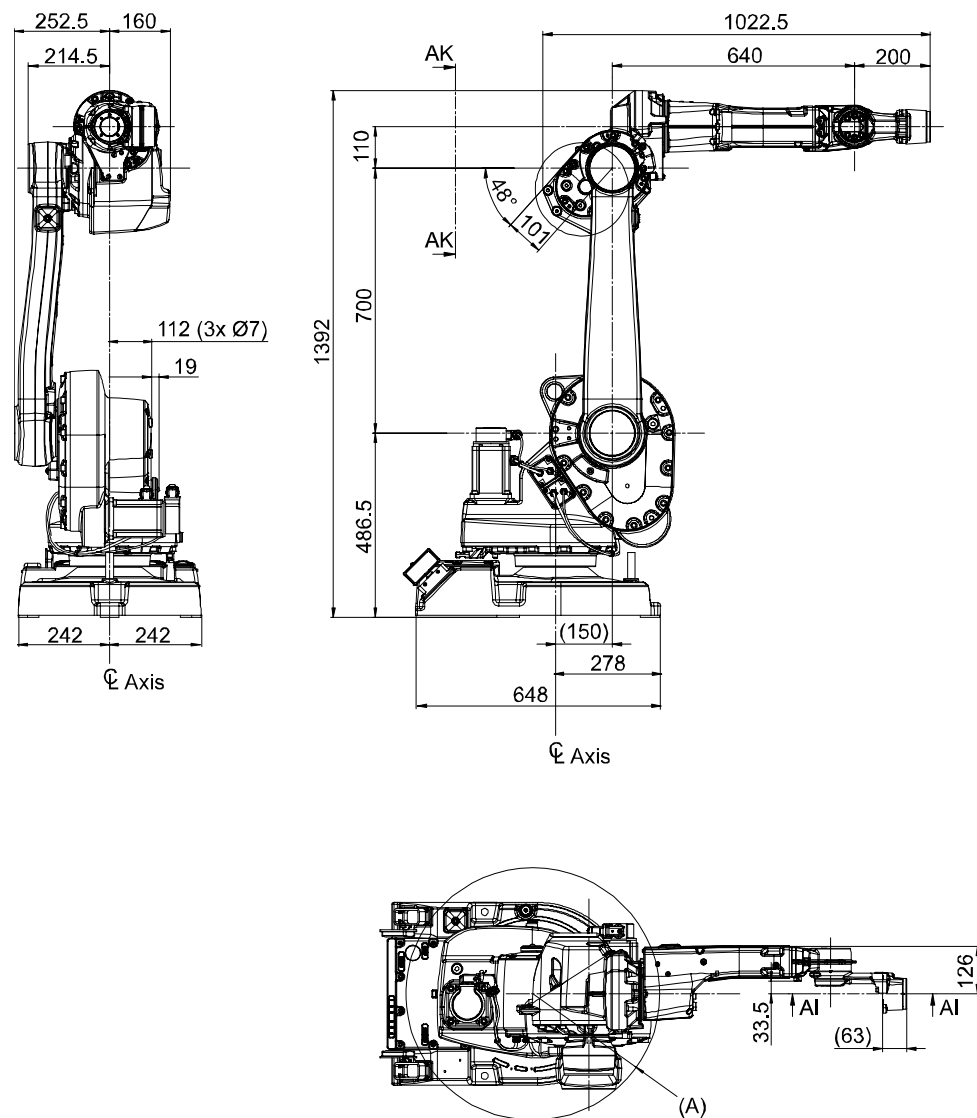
View of the manipulator from the back, side and above (dimensions in mm).
